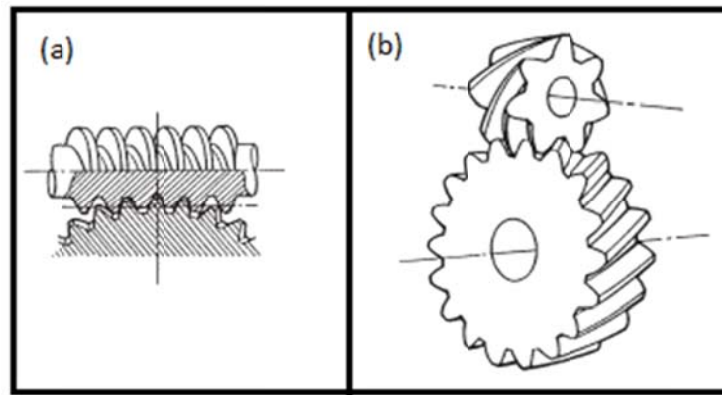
Nonparallel And Nonintersecting Axes Gears; (a) Worm Gear; (b) Screw Gear
